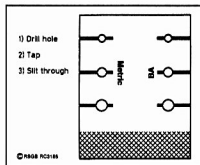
G3VTS plate for cleaning up screw threads. Plate can be gripped where shown at the bottom in a vice.
